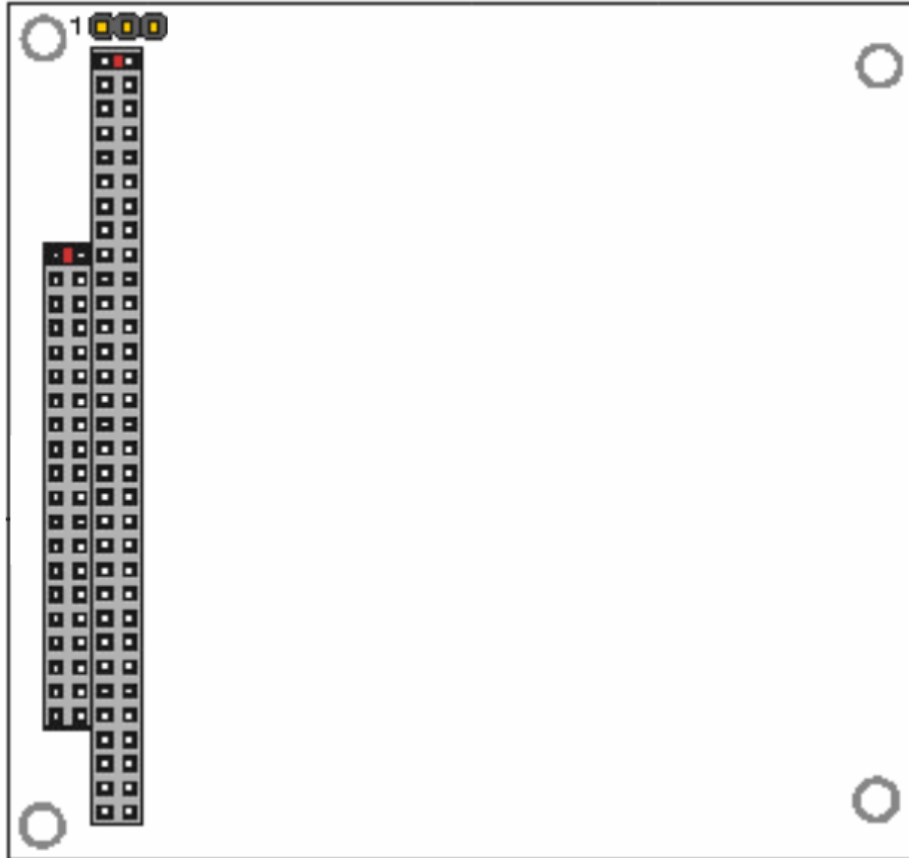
Jumpers and solder jumpers on the DAQ-1250 board
